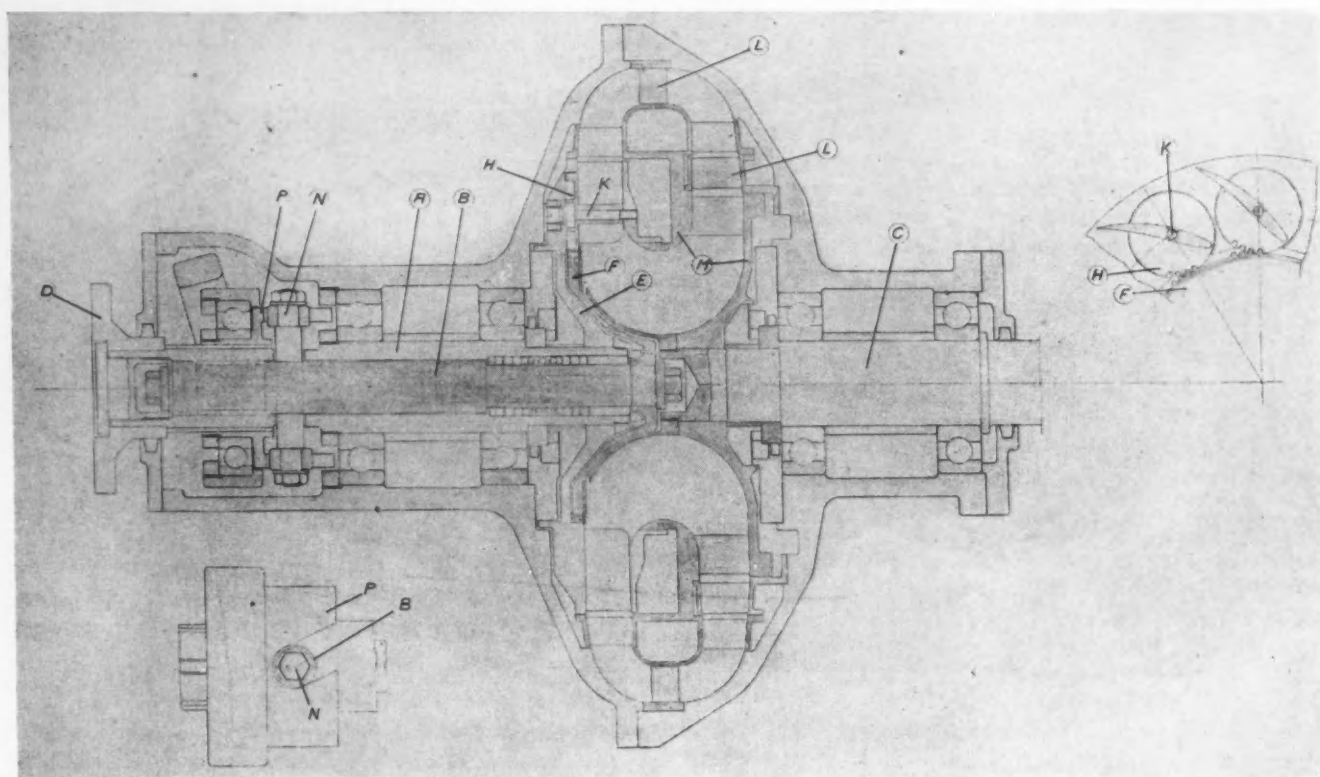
A Lysholm-Smith Converter with Adjustable Pump-Blades
